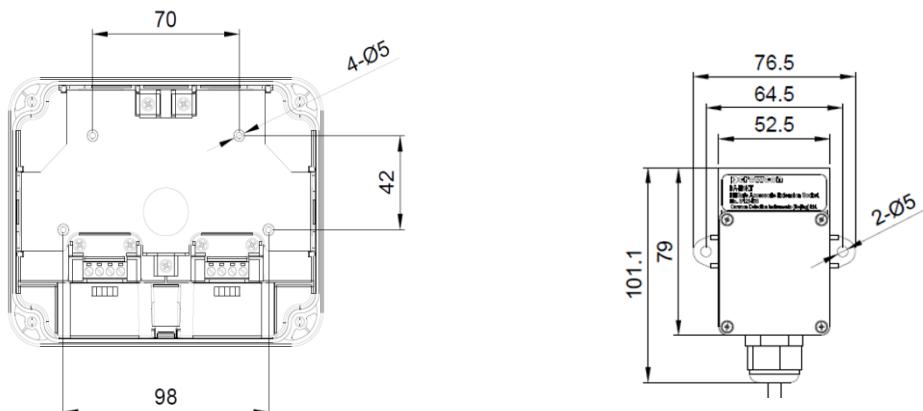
Mounting Points on Transmitter (left) and Remote Cable Sensor End Adapter (right) (mm)
